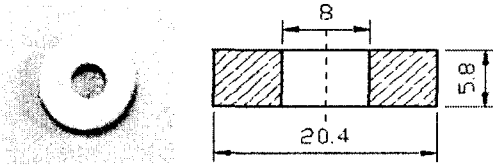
The shape of the copper specimen for fuel pump motor commutator manufacturing test
